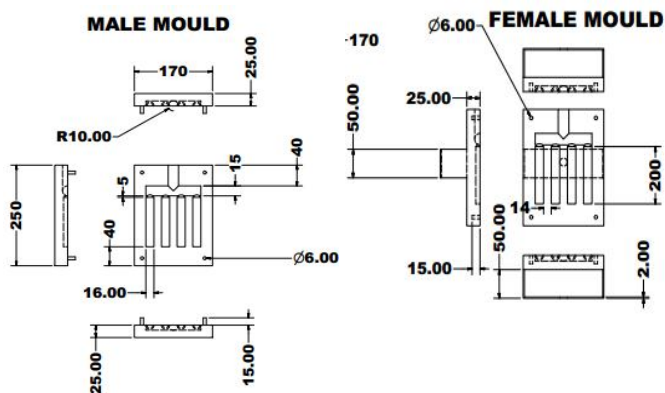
Male and Female Moulds for Squeeze Cast Moulds
